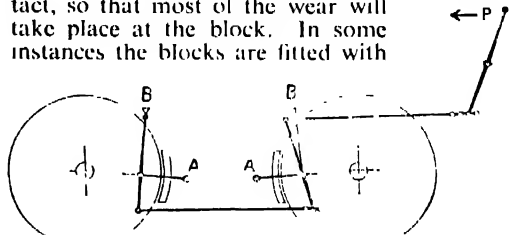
Brake gear as used on a four-wheel bogie vehicle.
